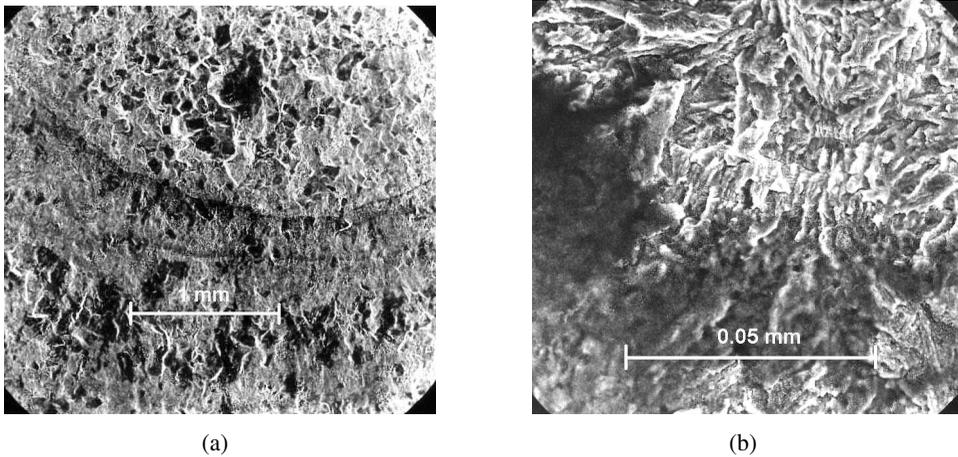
Oxide debris layer of considerable thickness due to fretting corrosion in near threshold region in air, a) total view of crack front, b) detail
